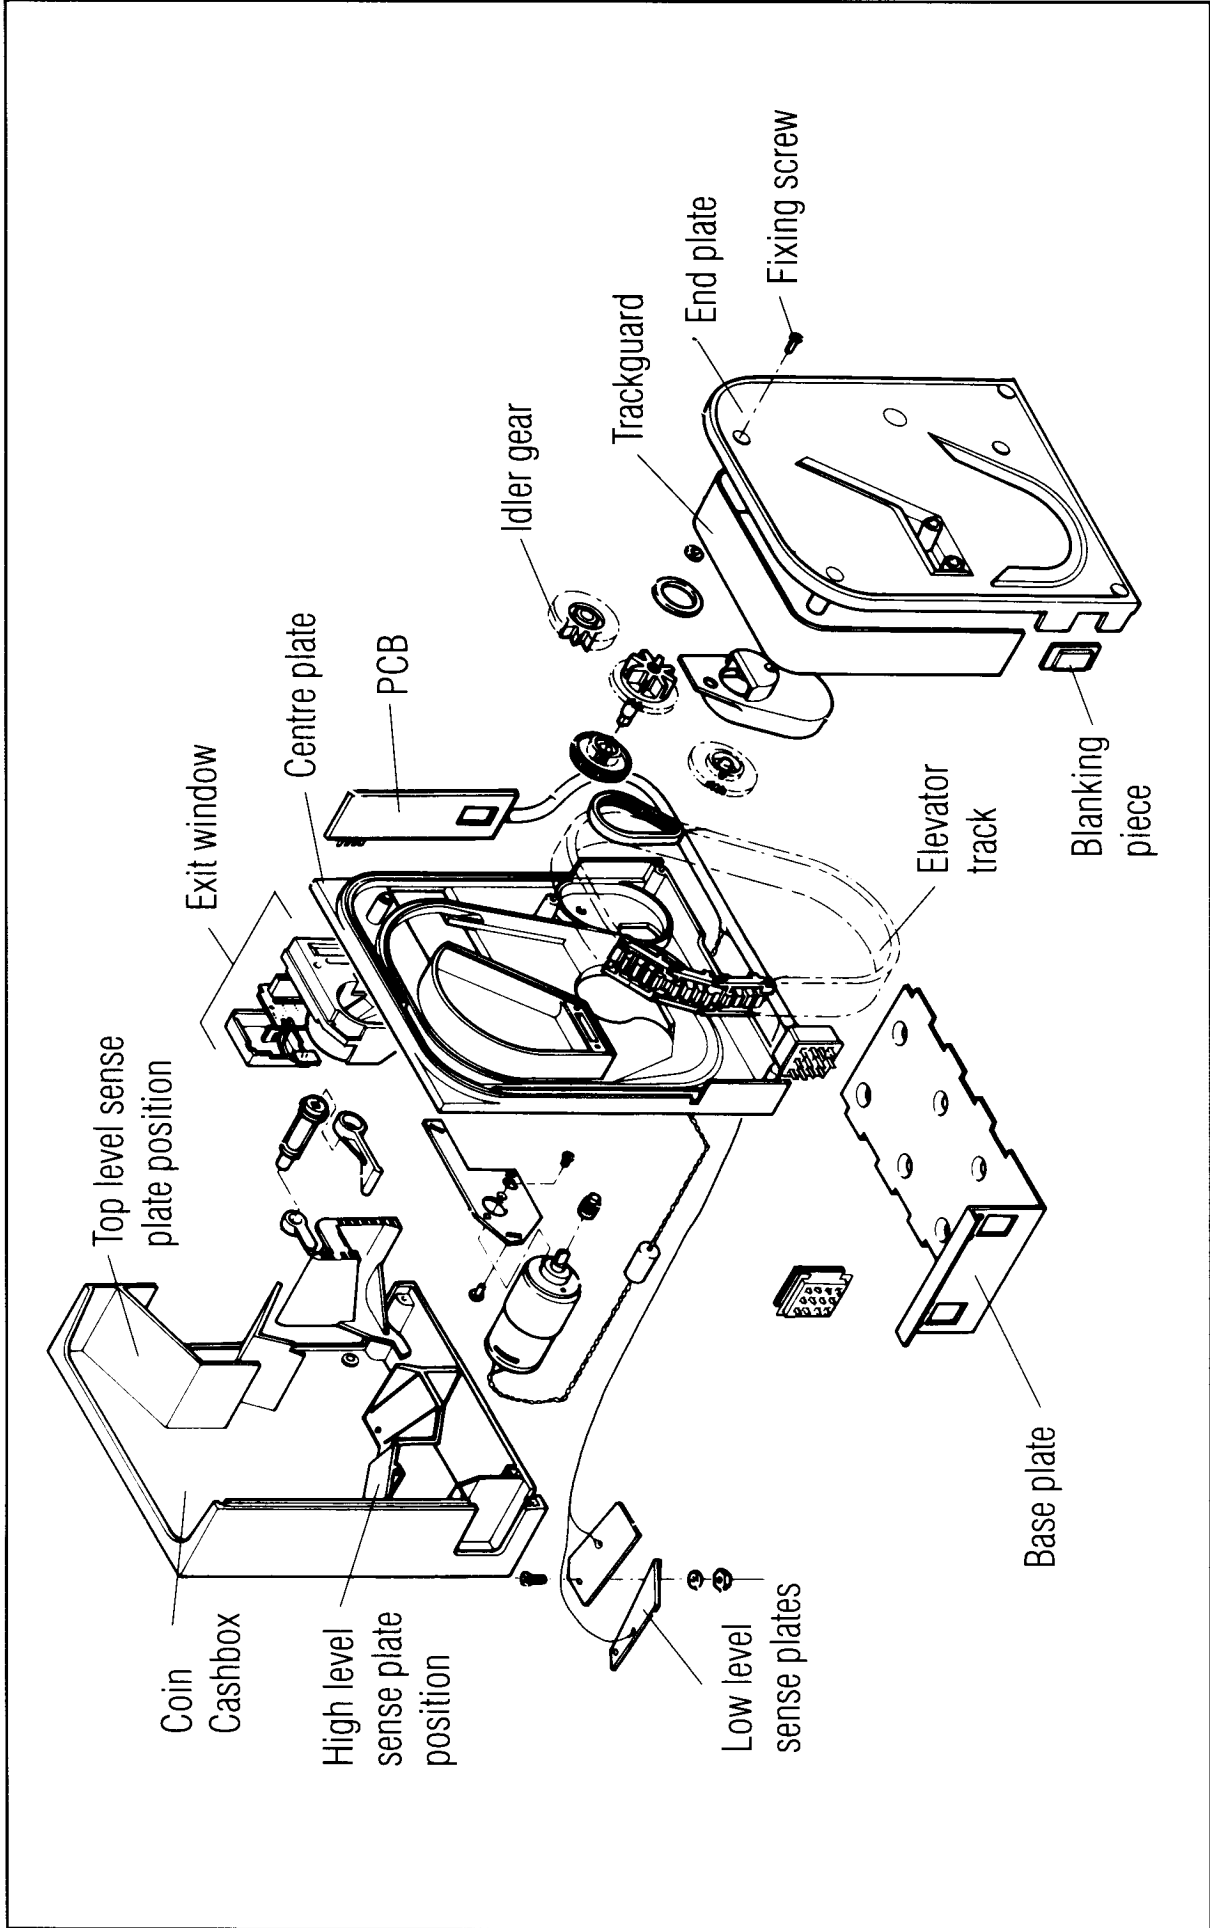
(b): Universal Hopper MkII/MkIII Exploded Diagram
